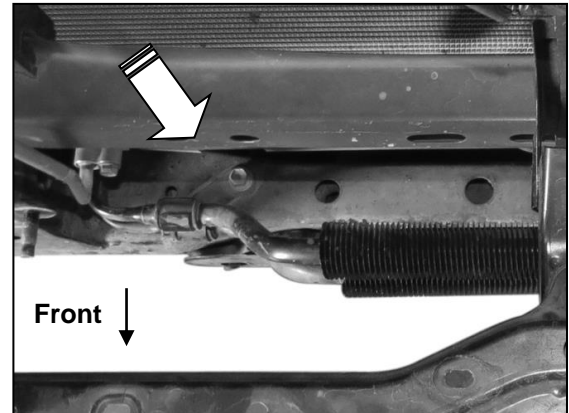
Remove plastic impact cover and aluminum inner bumper and brackets
